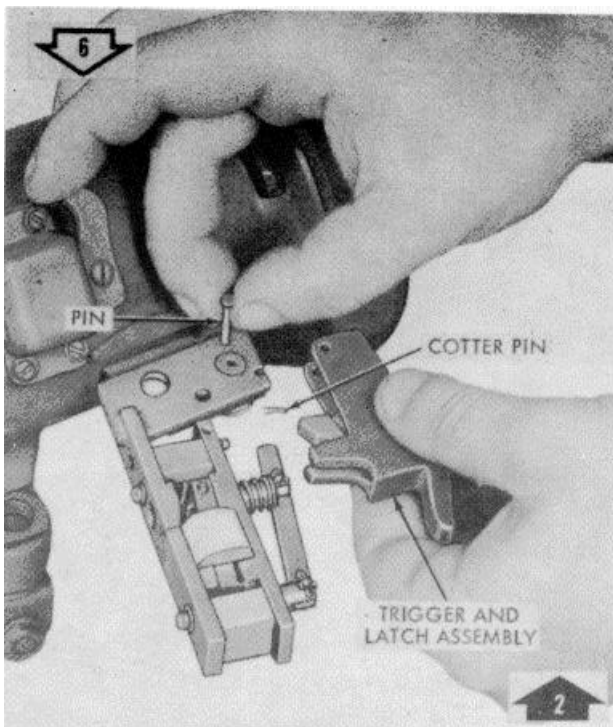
Removal/installation of firing mechanism group. (1 of 2)
